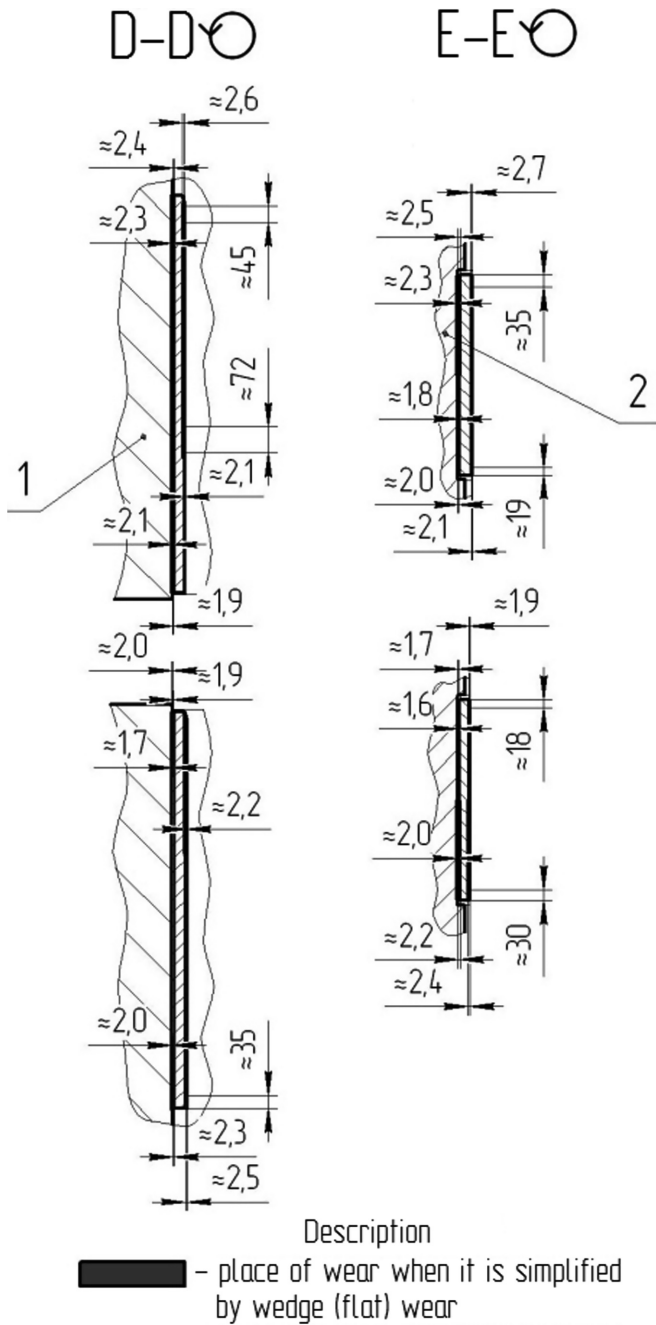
Maximum wear of flat contact surfaces of lining straps and facing strips of BWR area: 1 is housing on operator side; 2 is BWR chock.
